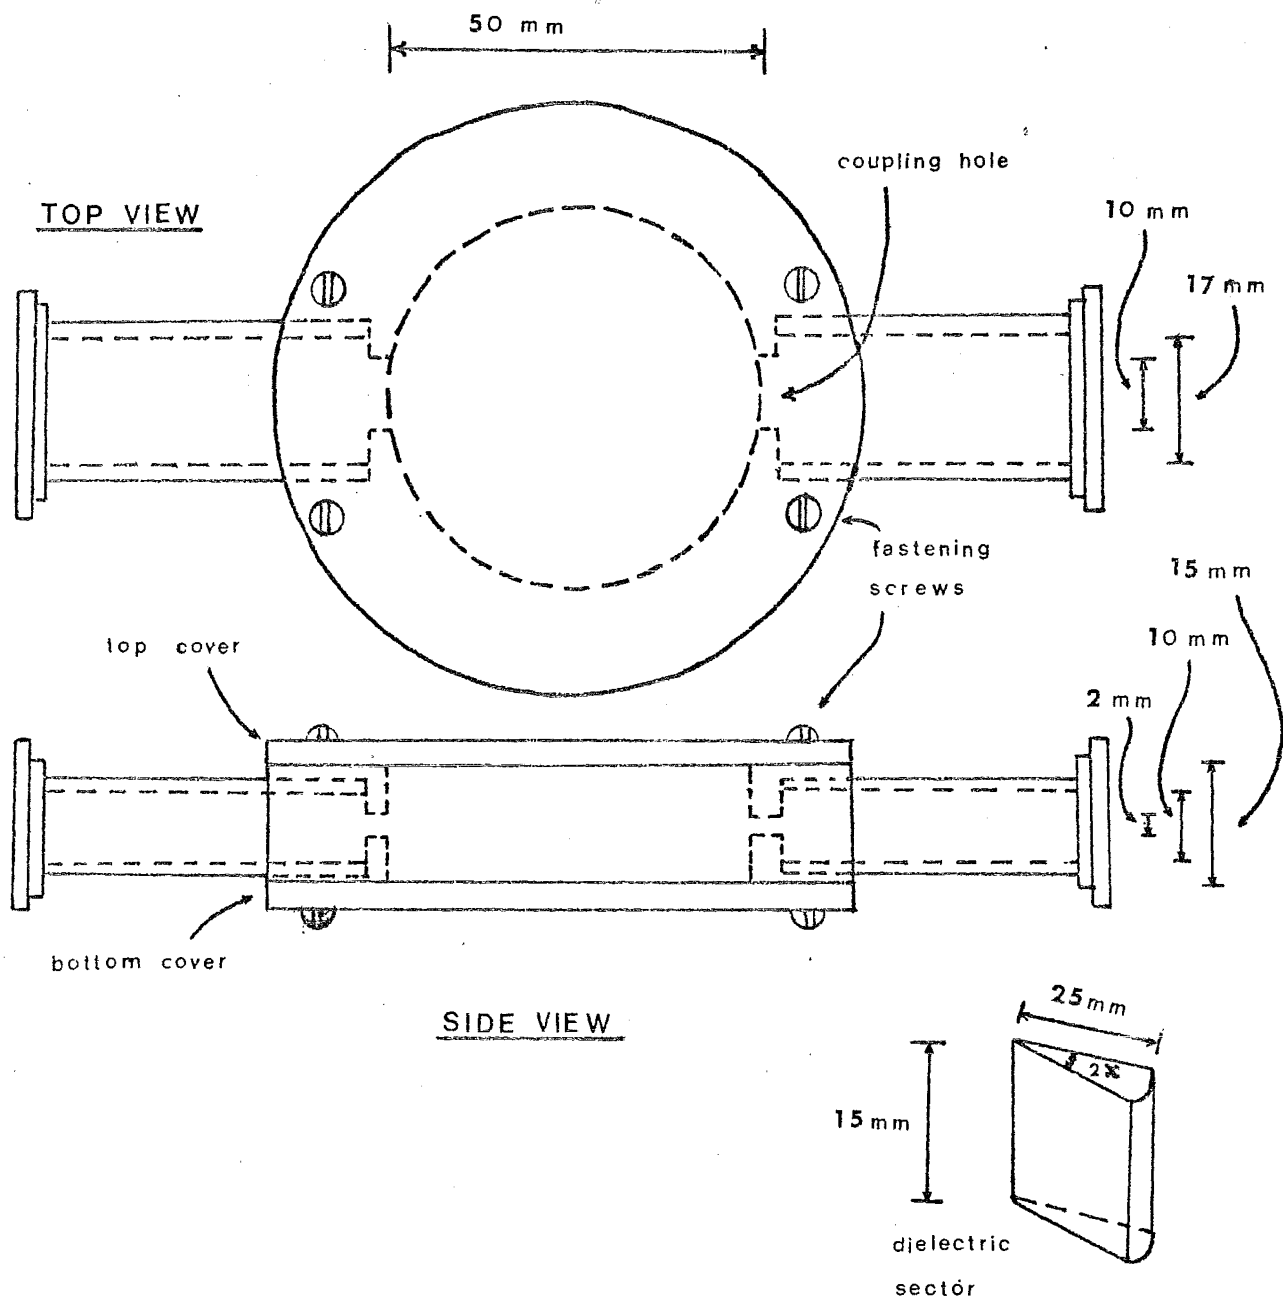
Top and side views of circular-cylindrical cavity. It is made from a section of brass tube and is coupled to two sections of standard (British WG 16) X-band waveguide through coupling holes. The various dimensions of the cavity, holes and waveguide are indicated in the figure. The insert is a sketch of a dielectric sector.
